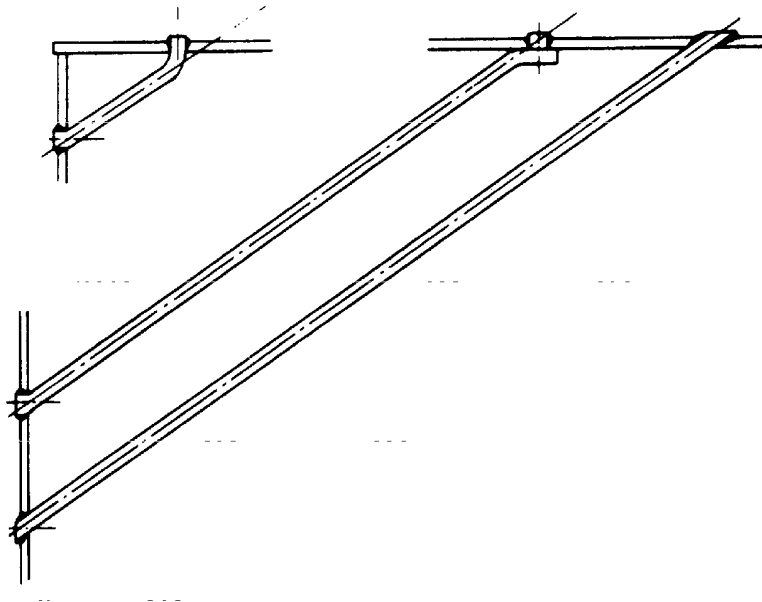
(b) UNACCEPTABLE TYPES OF DIAGONAL STAYS FOR INSTALLATION BY WELDING
